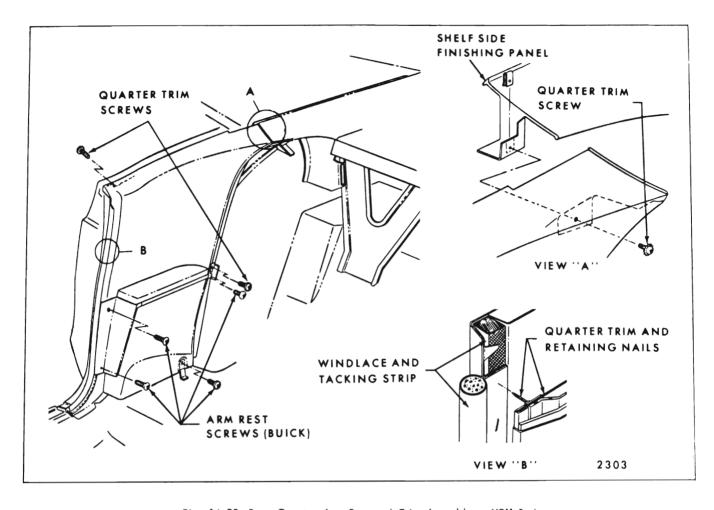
Rear Quarter Arm Rest and Trim Assembly -"E" Body
